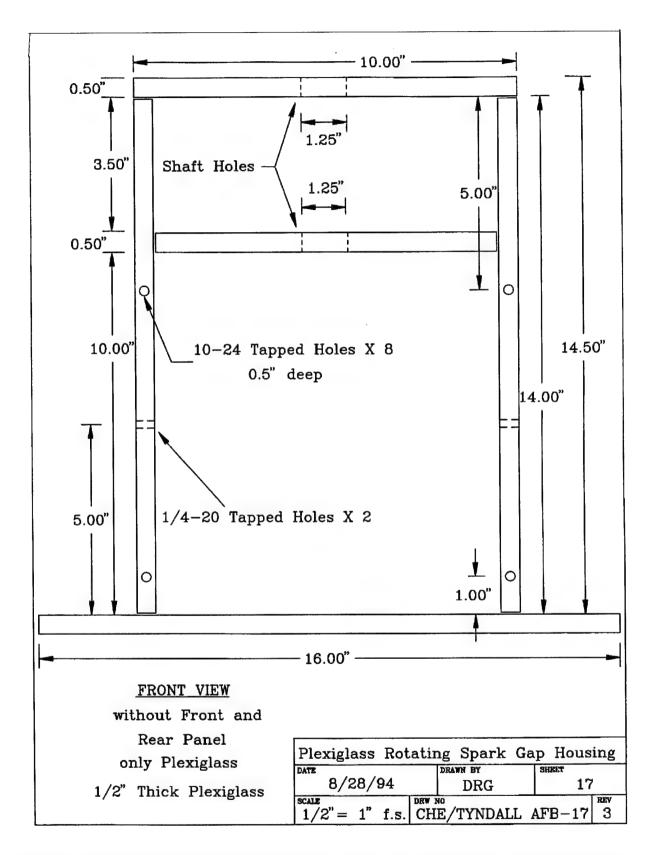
Plexiglas Rotating Spark Gap Housing - Front View (without Front and Rear Panels)
